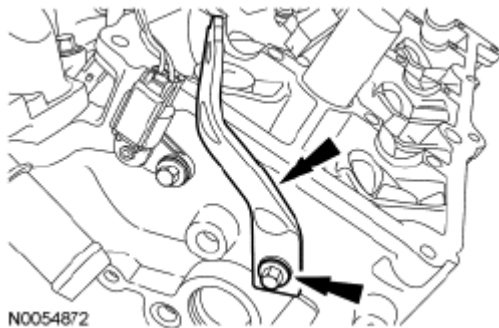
Locating Upper Intake Manifold Support Bracket & Bolt
